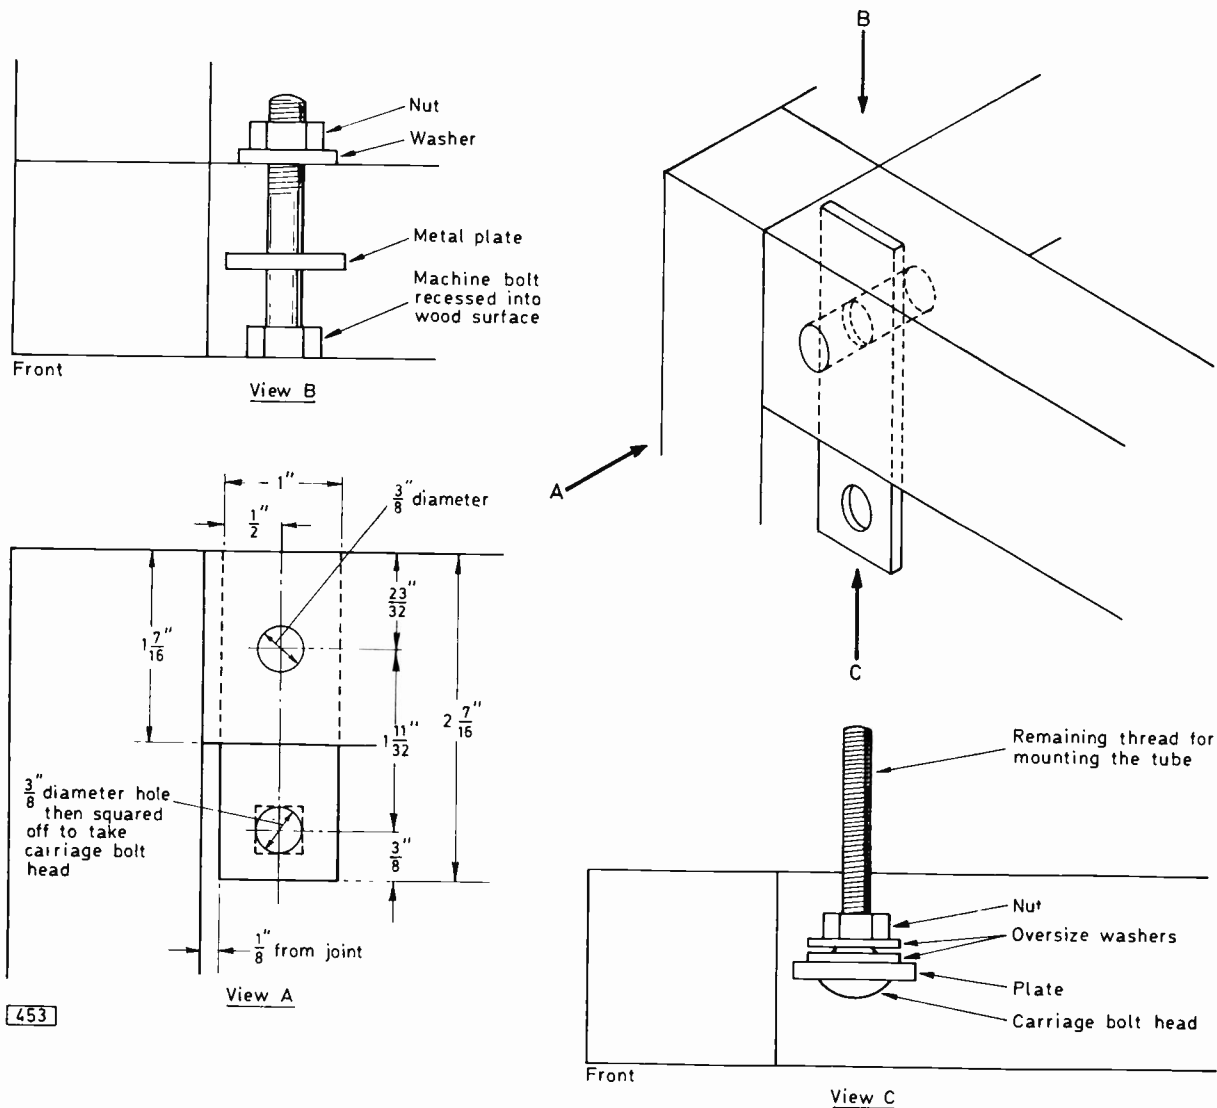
Tube mounting arrangement: top left-hand corner shown.
